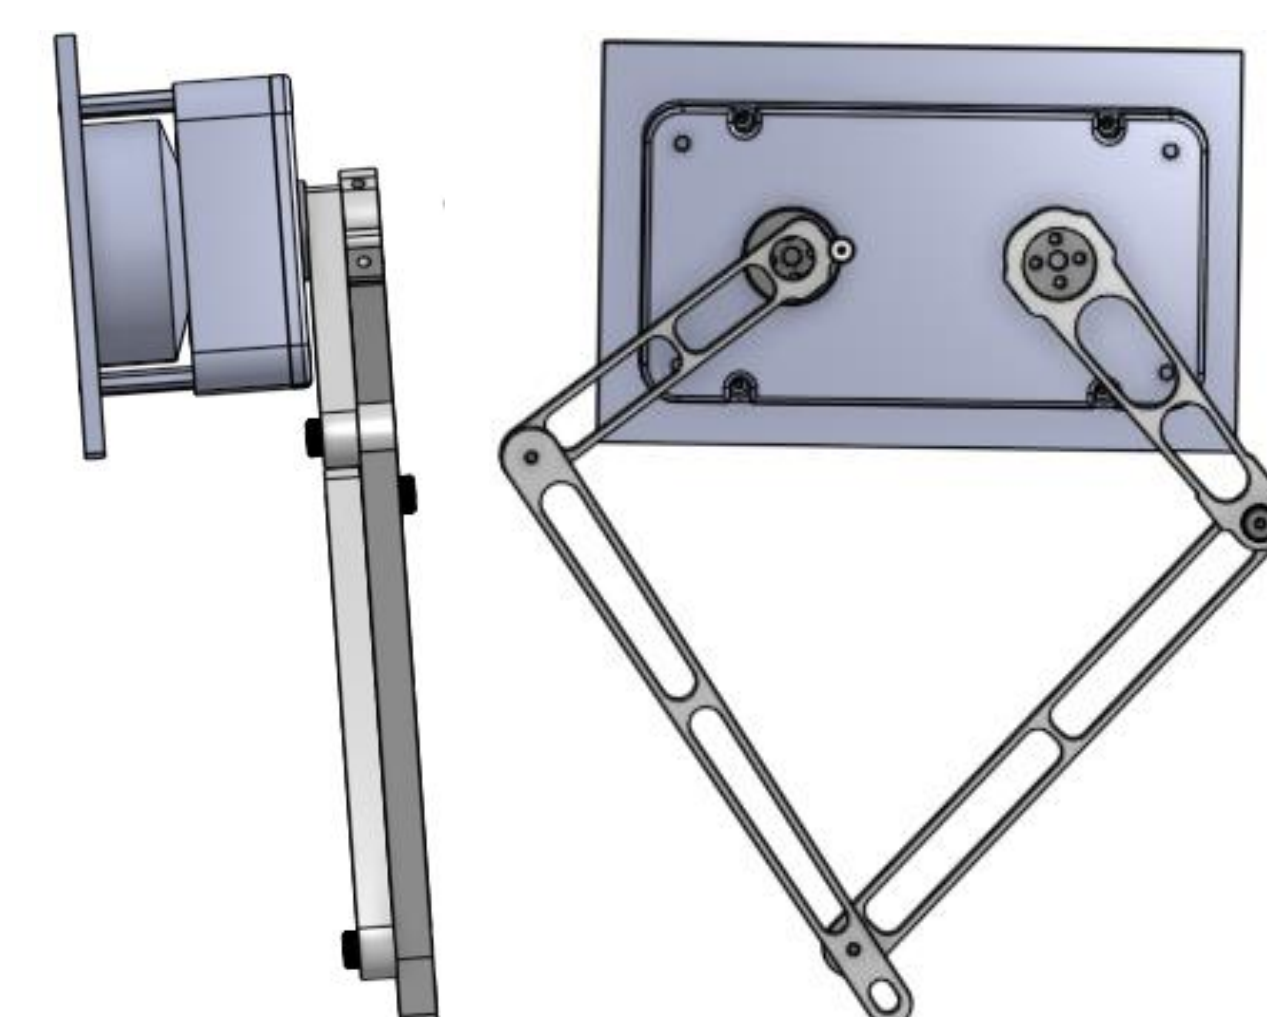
Front and side views of robot leg assembly with gearbox iteration 6. The baseplate represents part of the robot superstructure.
